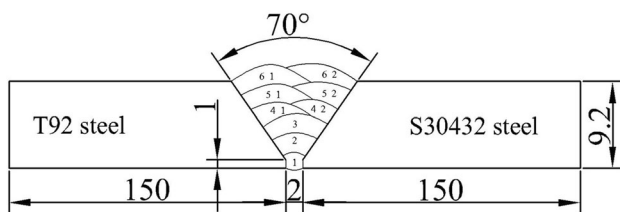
Schematic of welding process for T92/S30432 dissimilar welded joints
